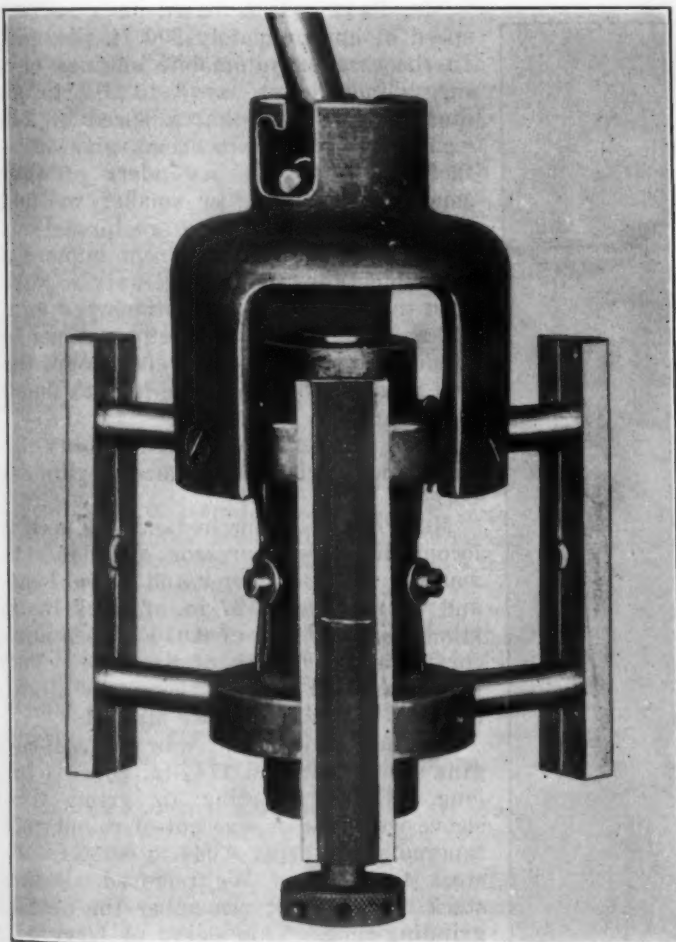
TYPE OF ADJUSTABLE DRIVE-HEAD TO CONTROL EXPANSION
